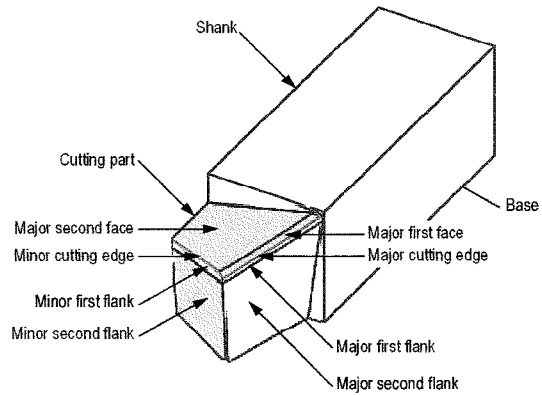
Cutting edges and surfaces on the cutting part of a turning tool
